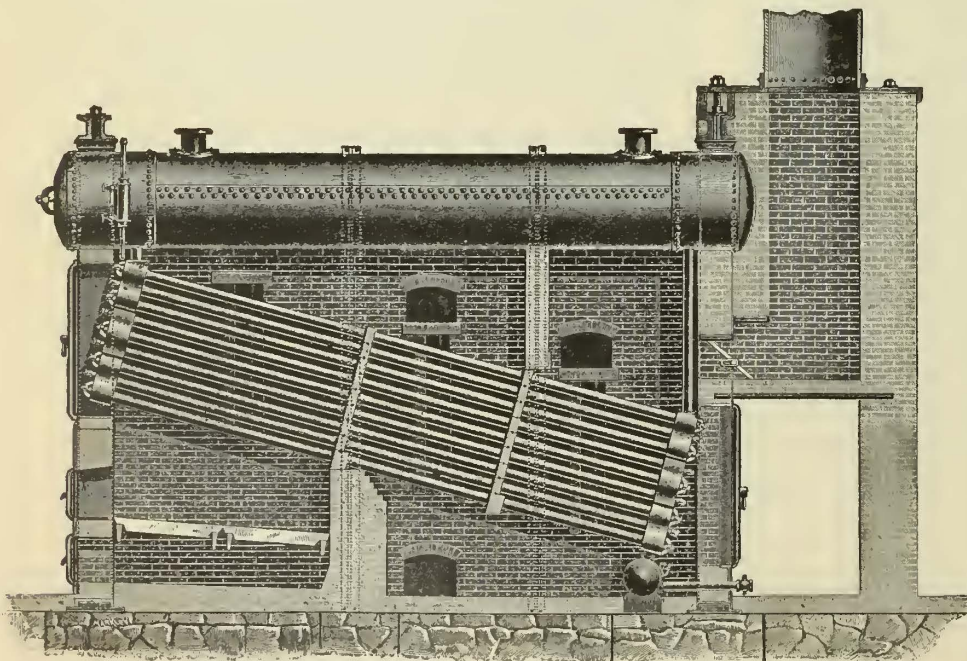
LONGITUDINAL SECTION—SAFETY WATER TUBE BOILER.
